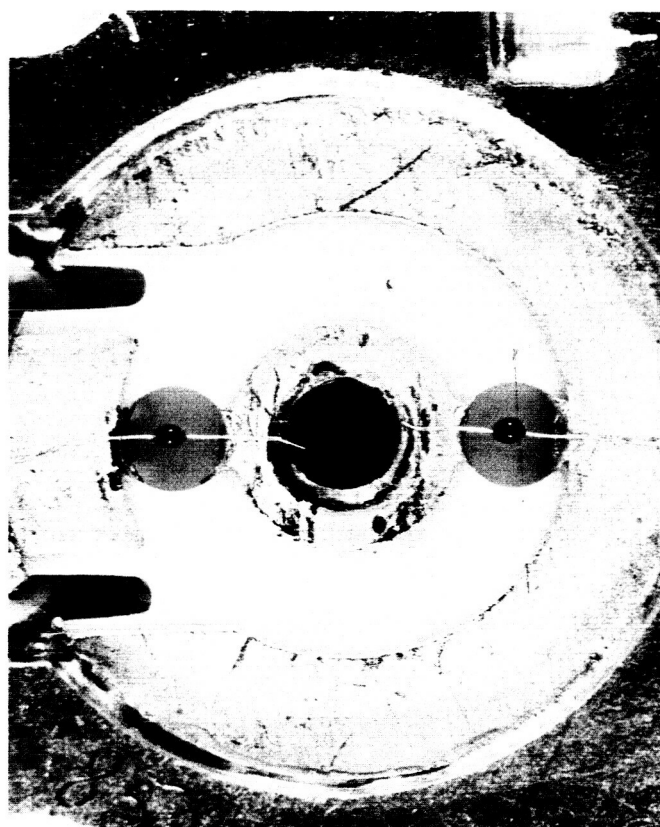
Photographic enlargement of disassembled thermistor mount showing the detection thermistors
